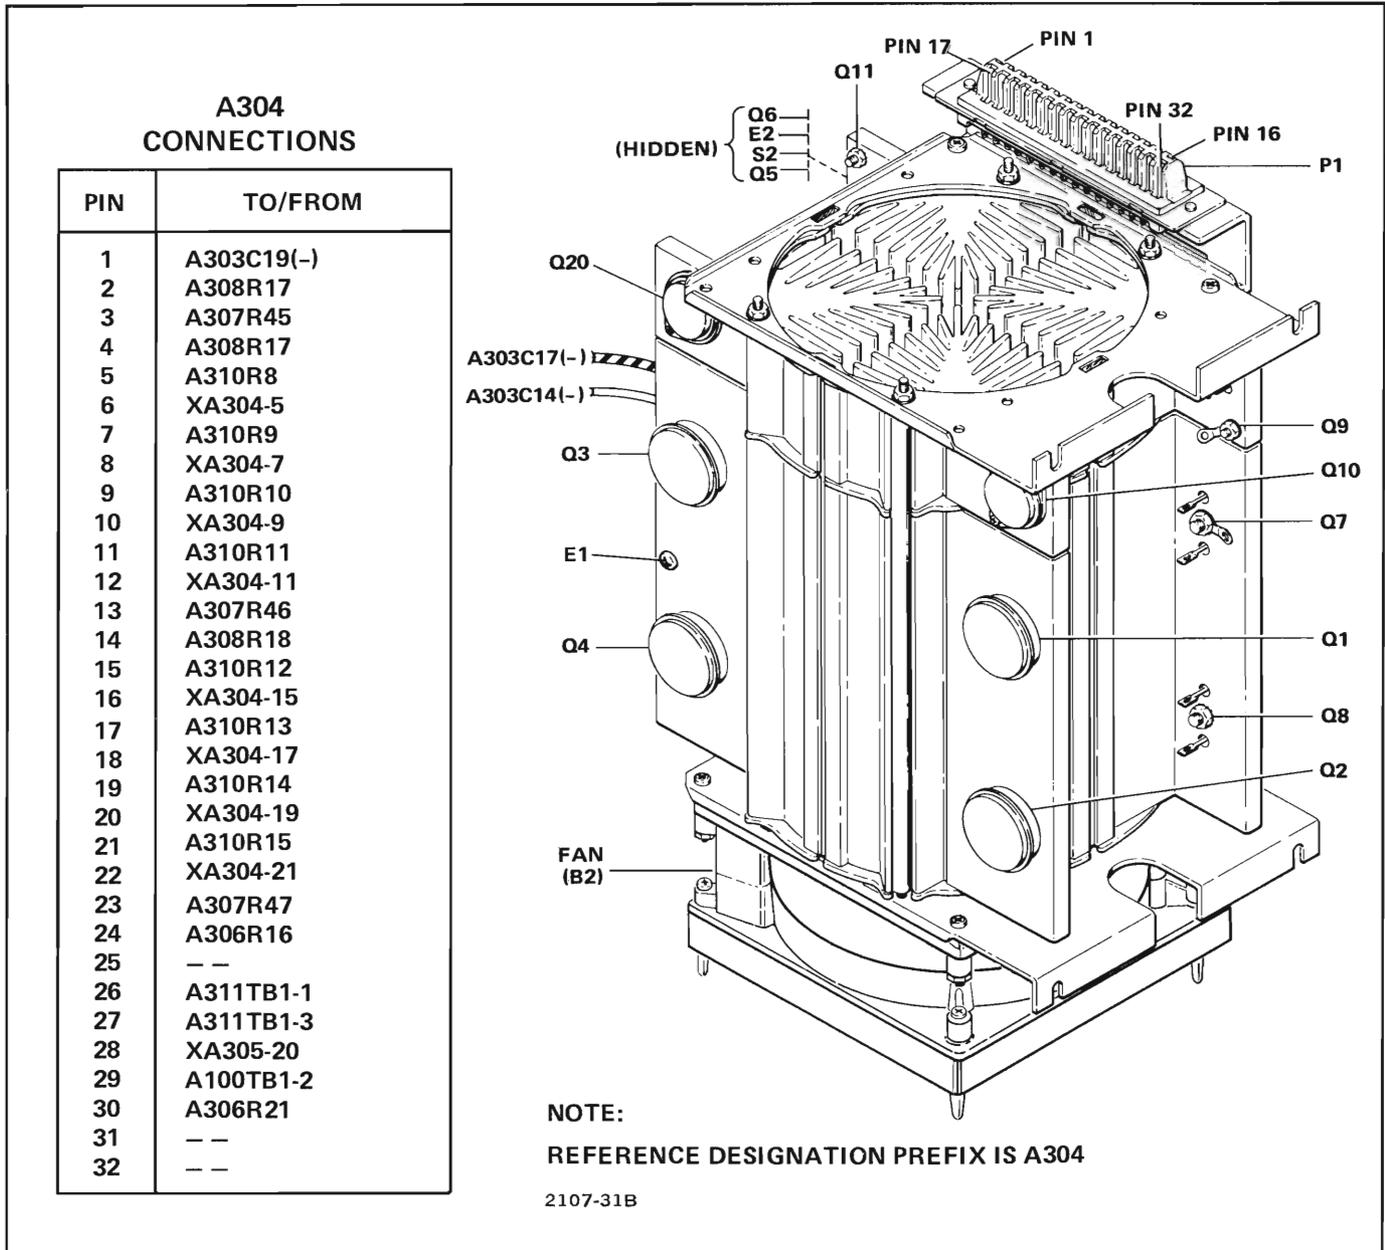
A304 Large Heat Sink Assembly (02116-63237), Parts Location and Connection Diagram
